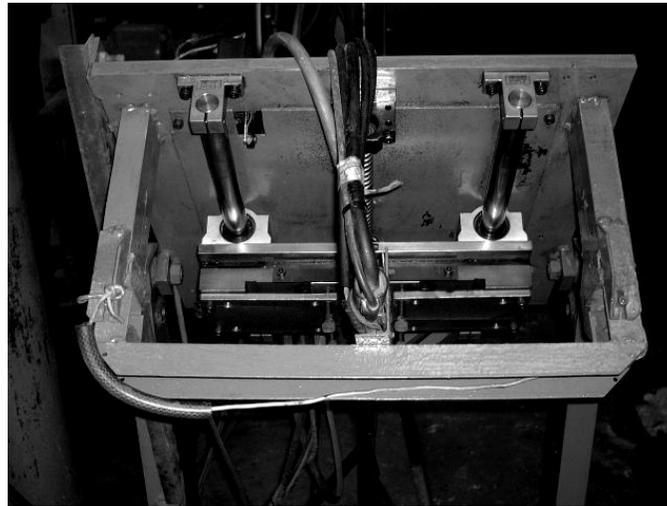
Welding table designed for the 10-h position welding experiment
